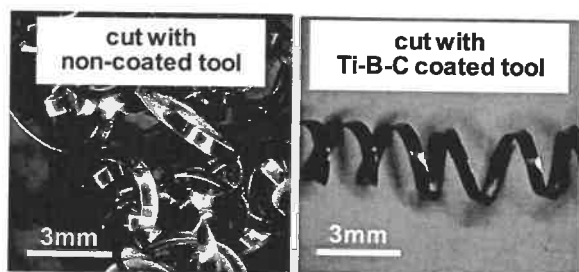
Chip in the machining of Ti alloy with Ti-B-C coated and non-coated tool, (depth of cut : 0.4 mm, cutting length : 1000 m).
